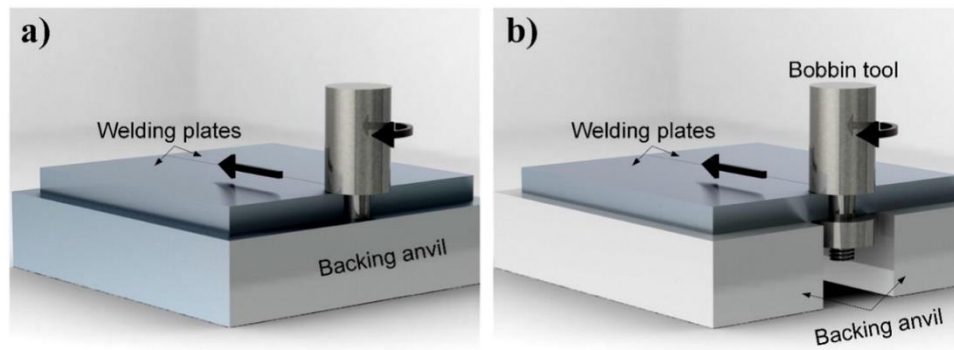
Shows two different types of friction stir welding, (a) Conventional and (b) Bobbin,
